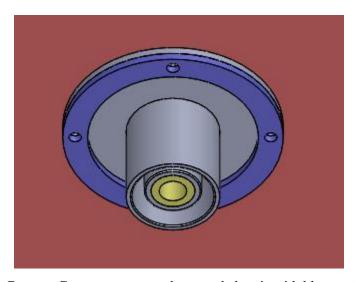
Concept Connector mounted on a red chassis with blue retaining washer
